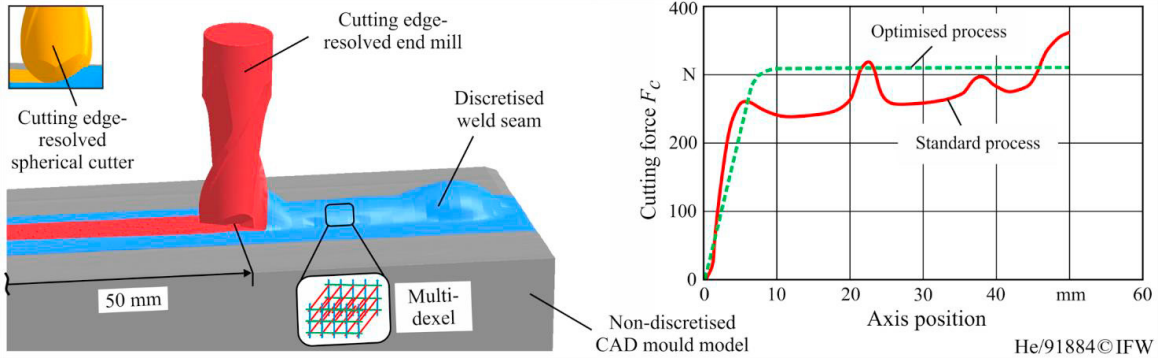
Geometric material removal simulation with cutting force prognosis for weld seam machining
